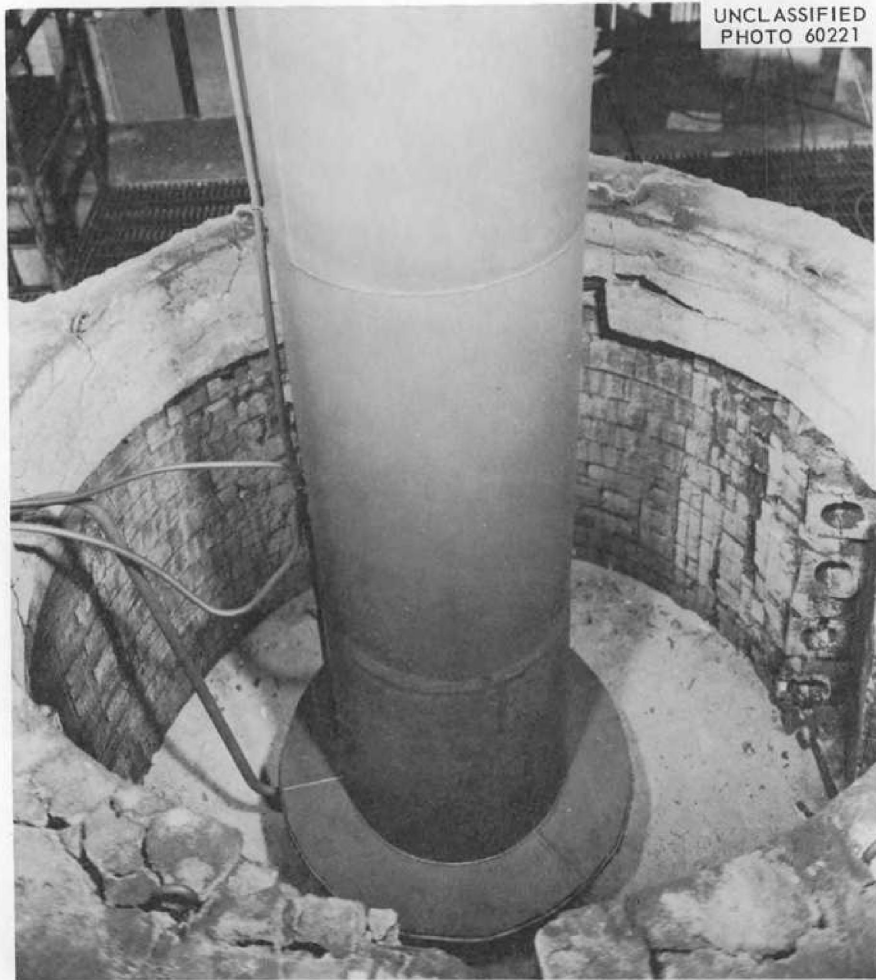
Retort Top in Place for Seal Welding.
